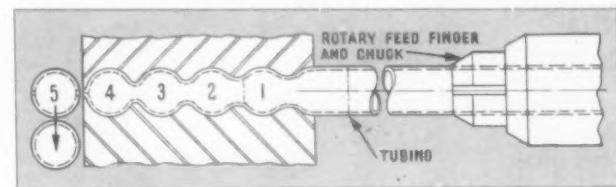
Section through dies of hammering machine, showing successive reductions of tubing in the manufacture of hollow balls.
